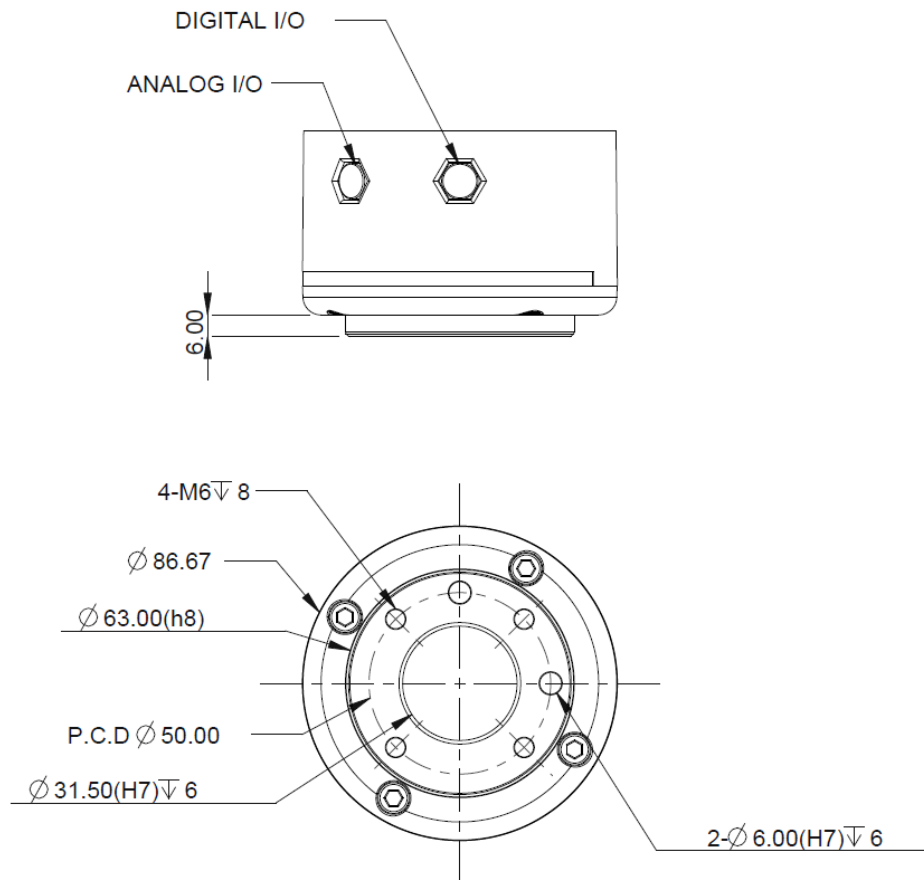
Reference of the Flange Surface of the End Module (HW 3.2)
